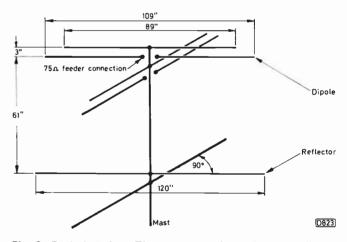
Exploded view. The two arrays have the same dimensions and are mounted at 90° to each other – the dimensions given are for a wideband (48-68MHz) version.
